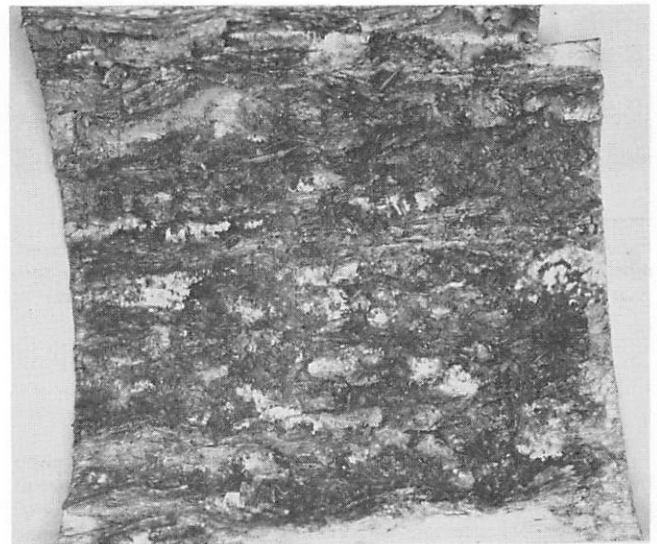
View of interior of the pipe showing extensive corrosion damage and trapped solids.
